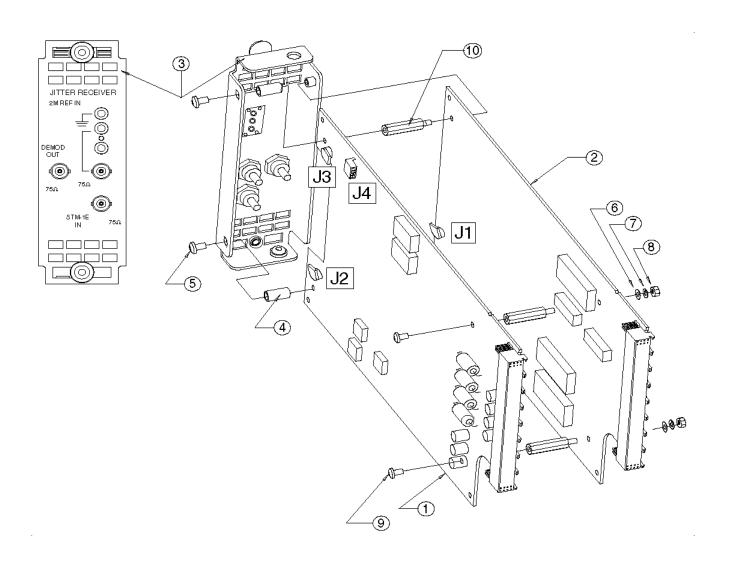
A1M STM -1e Jitter Rx Module - Exploded View
